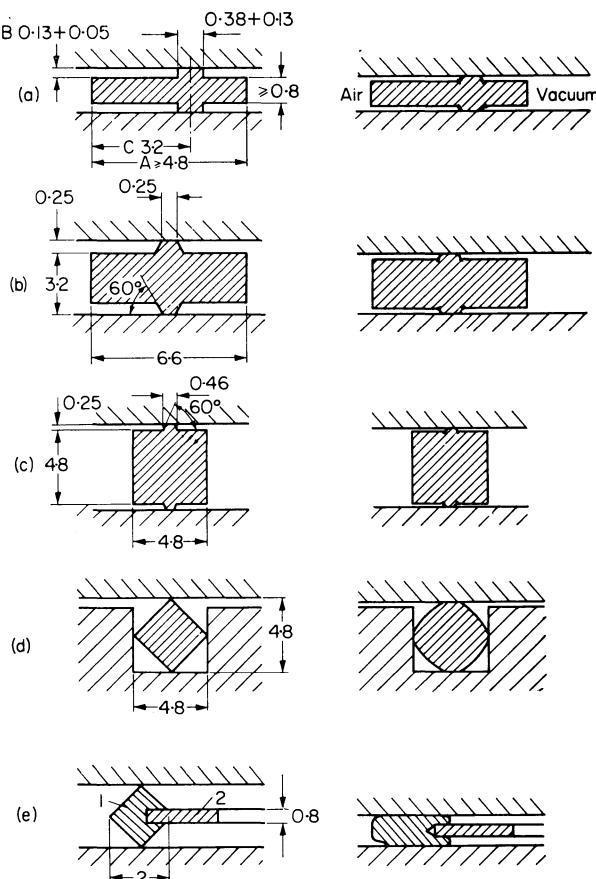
Plane seals with gaskets of special shapes: (a) gasket with beads (after Milleron⁸⁶⁵); (b) coined gasket (after Wheeler¹³⁰⁴); (c) gasket with ridge (after Goertz⁵⁵⁸) (*Courtesy of Pergamon Press*); (d) Diamond cross section gasket in groove (after Hoch⁵⁶⁸); (e) diamond cross section gasket between flat flanges (after Kienel⁶⁷¹) (*Courtesy of Rudolf A. Lang Verlag, Esch/Taunus, Germany*)
